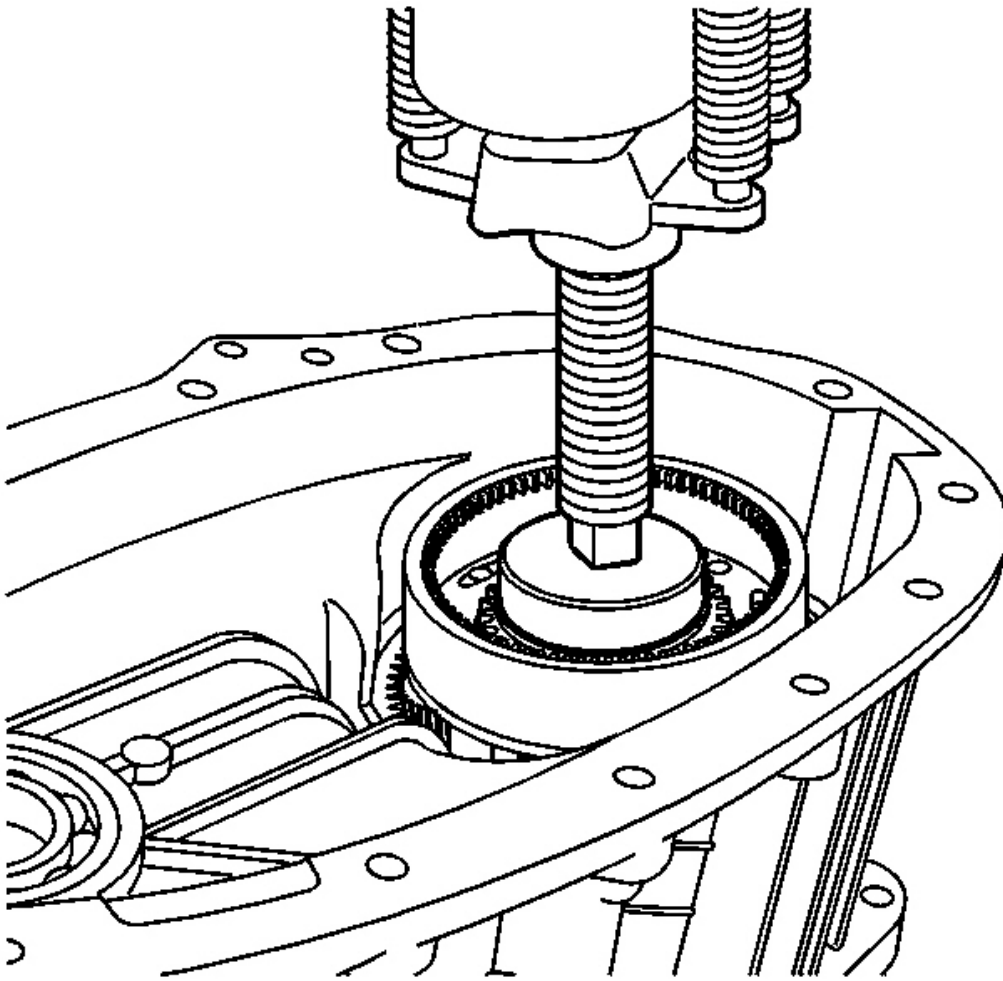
Installing The Small Diameter Thrust Washer Onto The Input Gear
